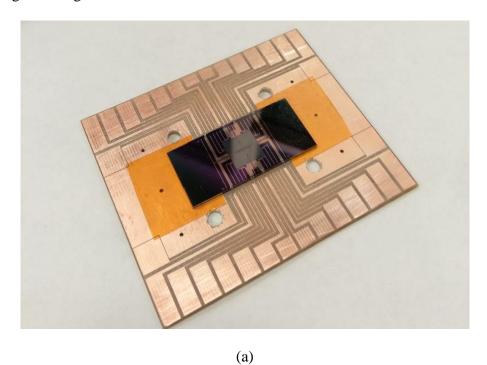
Design of PCB illustrating the pads for soldering and wirebonding.
